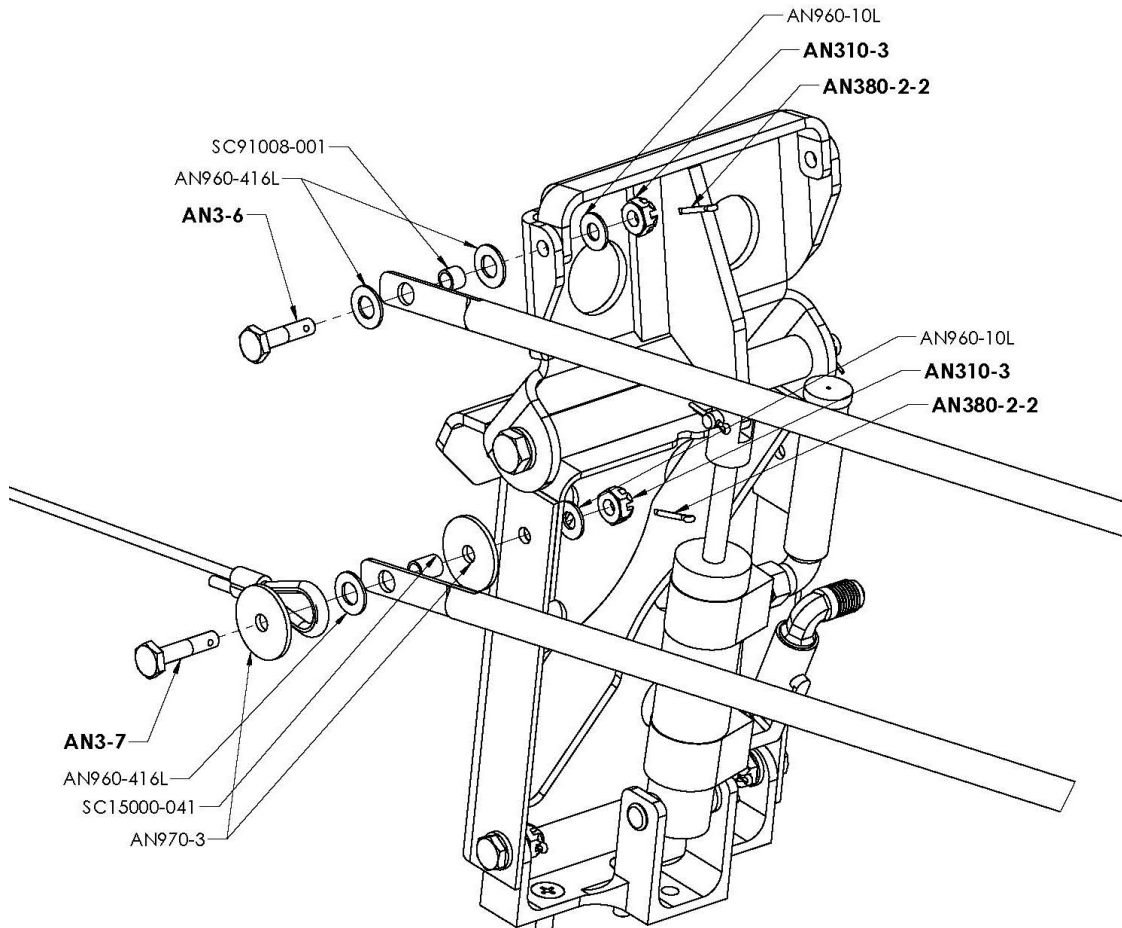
Rear Rudder Pedal Detail (Right-Side Shown)
